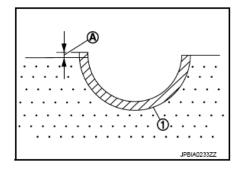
Identifying Main Bearing Crush Height Courtesy of NISSAN MOTOR CO., U.S.A.
